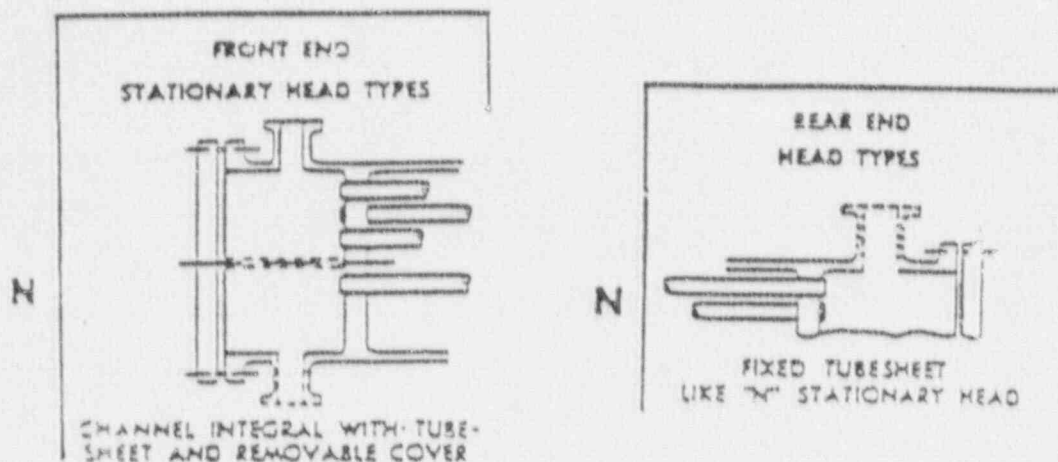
SHELL-AND-TUBE HEAD TYPES
